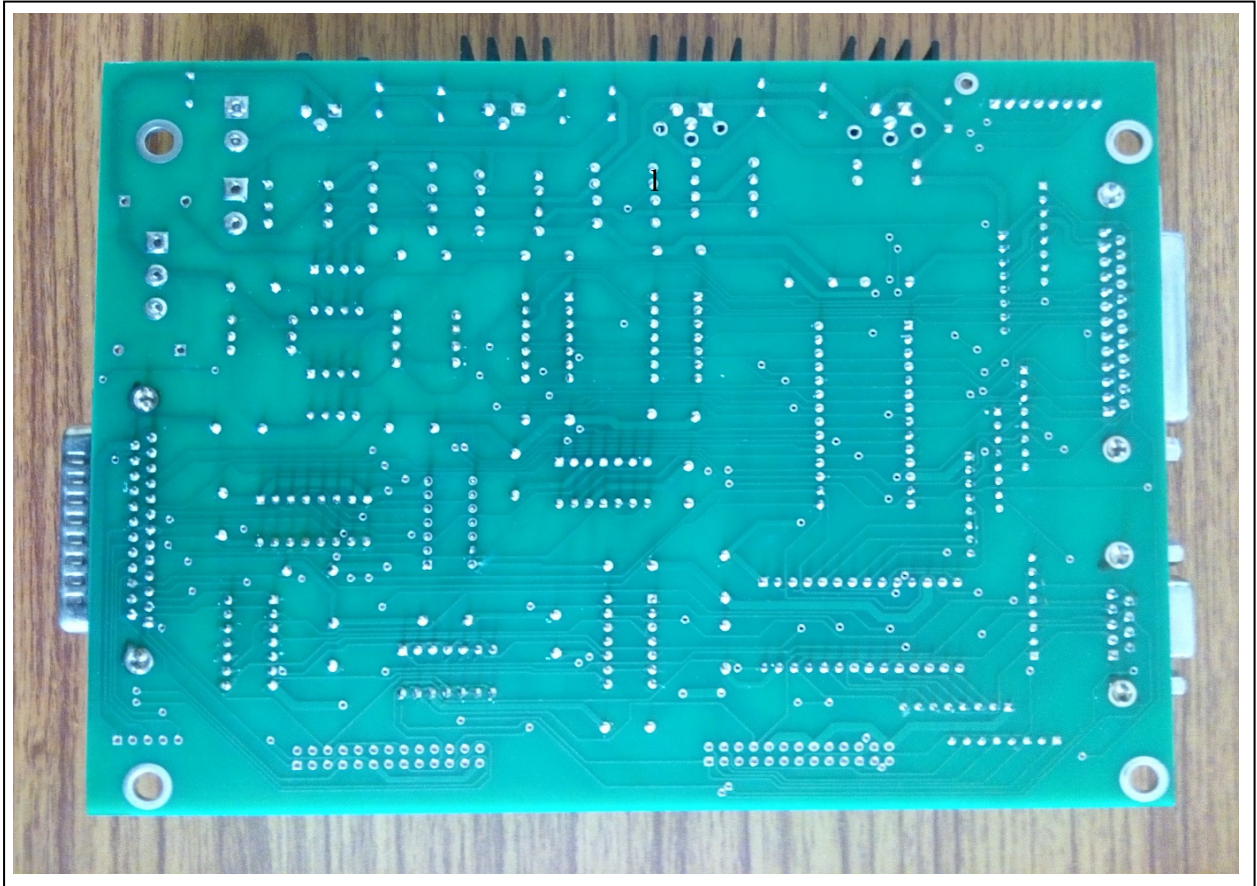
(b) Assembled RFCM card Ver.3 Bottom View
